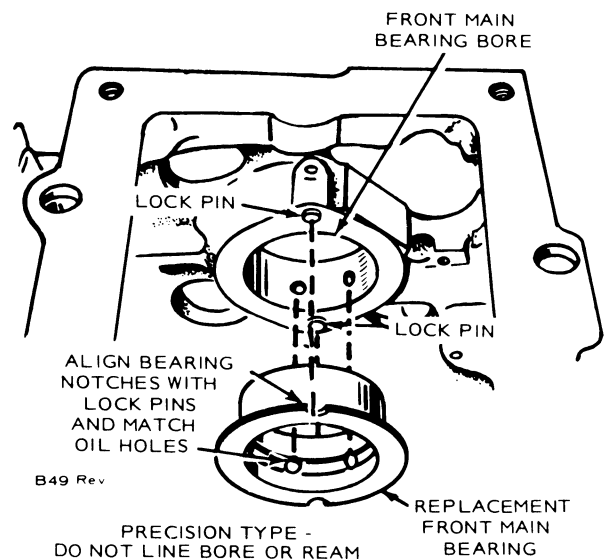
FRONT MAIN BEARING INSTALLATION
